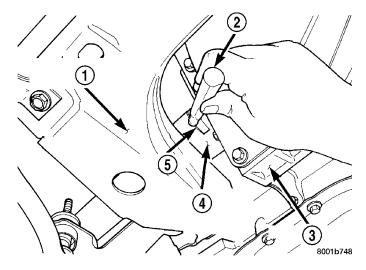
Disengaging Left Inner Tripod Joint from Transaxle
